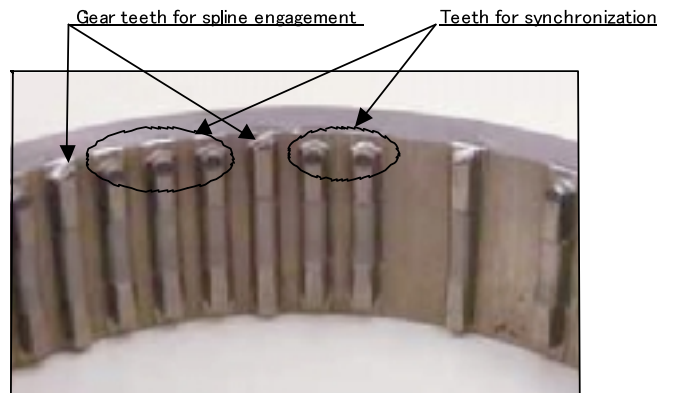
Cold Forged Sleeve with Two-stage Chamfer
